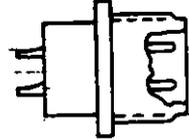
Smooth puddled surface flush with babbitt surface of bearing.
